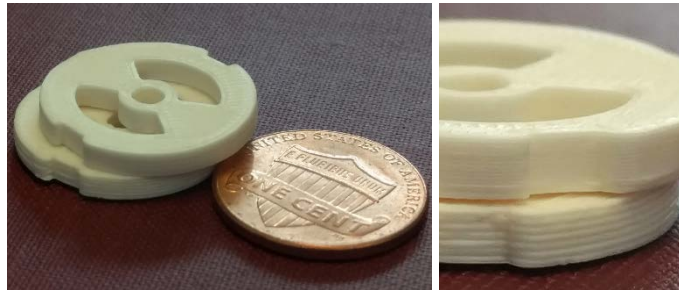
A part printed with a fine nozzle on top of the same part printed with a large nozzle.
